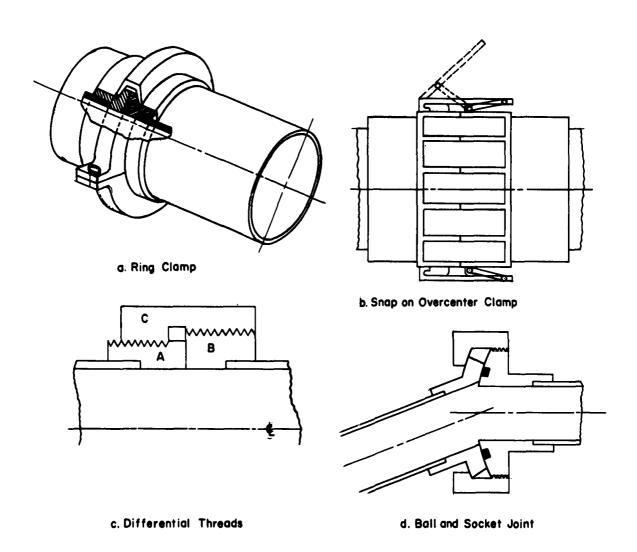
FITTING-TO-FITTING DESIGNS CONSIDERED
